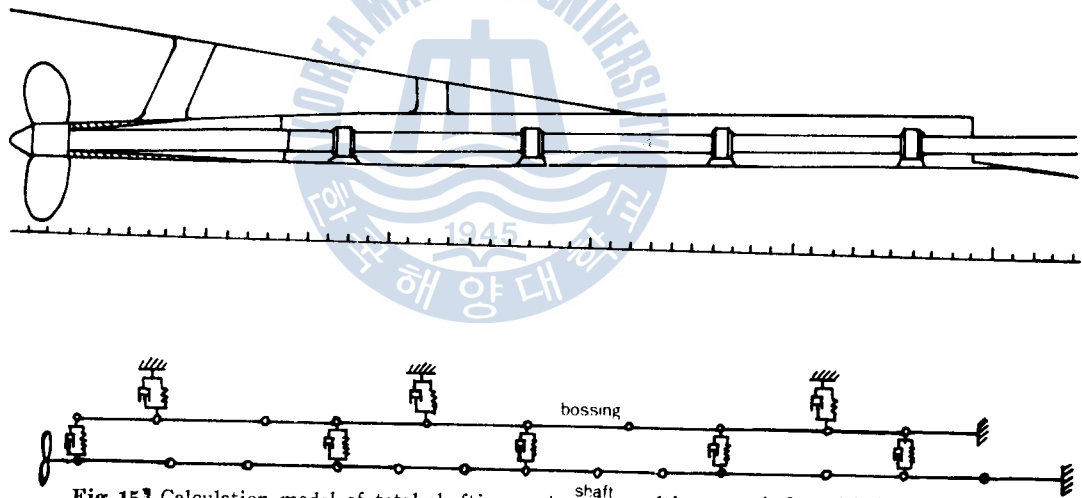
Calculation model of total shafting system in multi-screw shafts with bossings.
